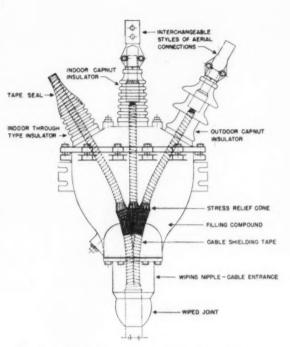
"Composite" drawing of multi-conductor pothead showing three different types of insulators.
